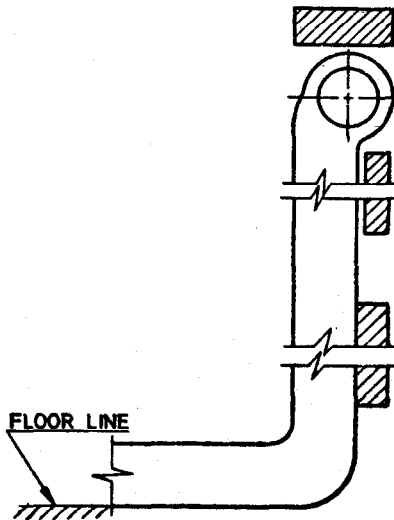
STANDARD FORK, SHAFT MOUNTED TYPE
